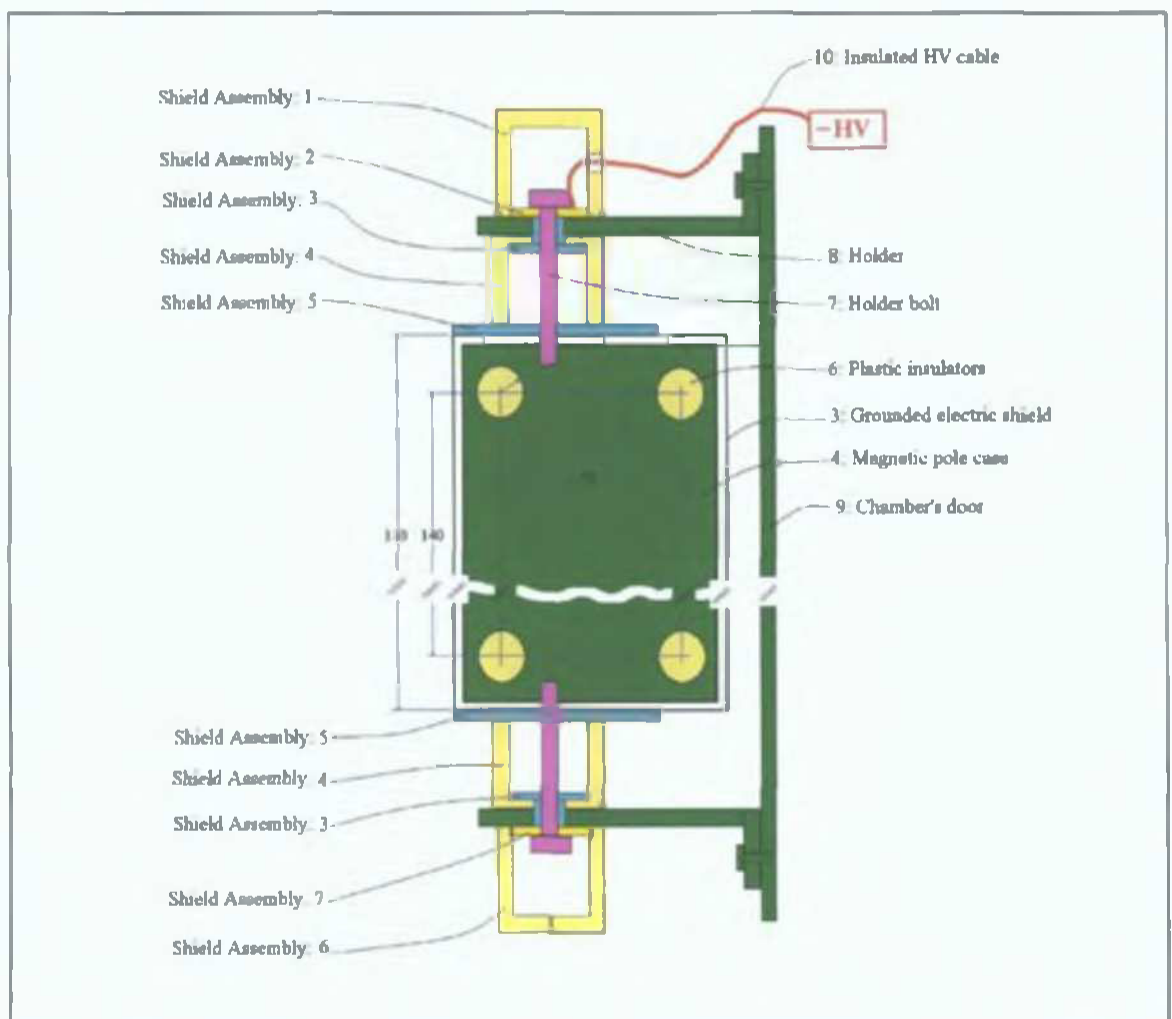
The target assembly showing the insulator shields designed to shield the hot electrode from the unwanted deposition and prevent arcing and sputtering on unwanted surfaces.
